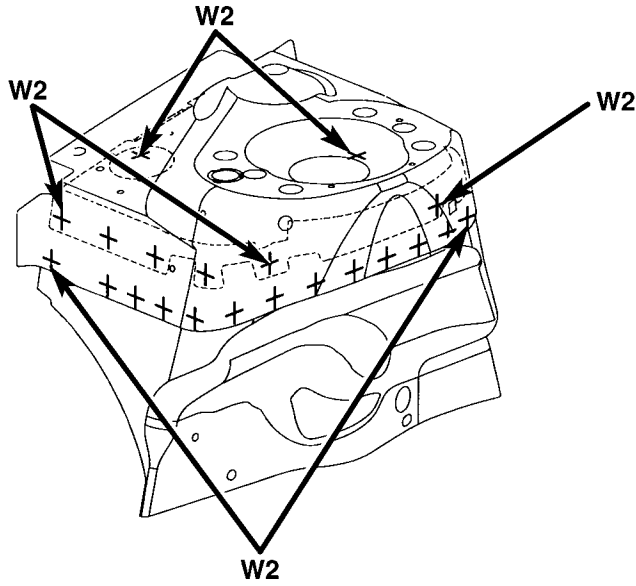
BUMPER EXTENSION, FRONT RAIL REINFORCEMENT & SPACERS TO FRONT SIDE RAIL
